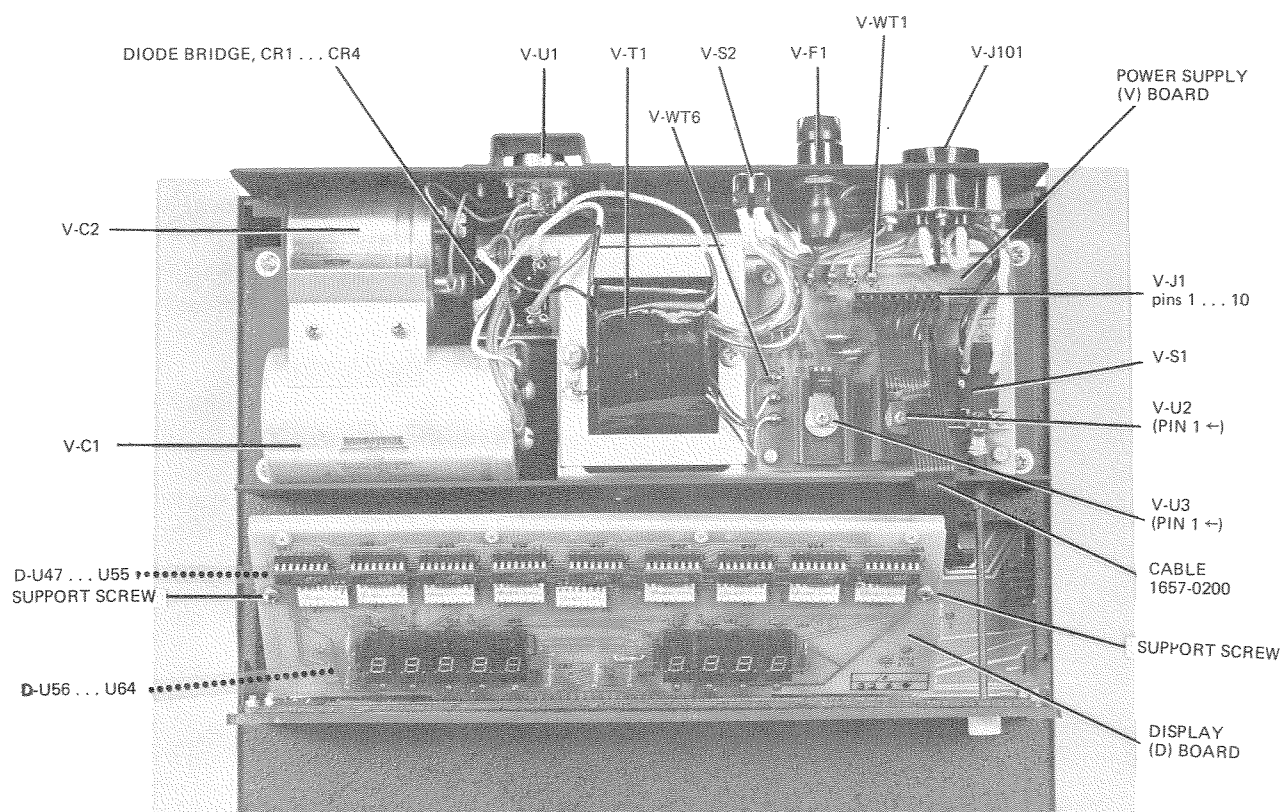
Power supply (V assembly) and display or DB board, shown in the instrument, with top cover off.
